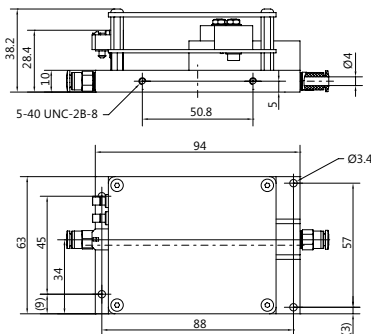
Outline drawing of DPD series driver with general purpose pad
